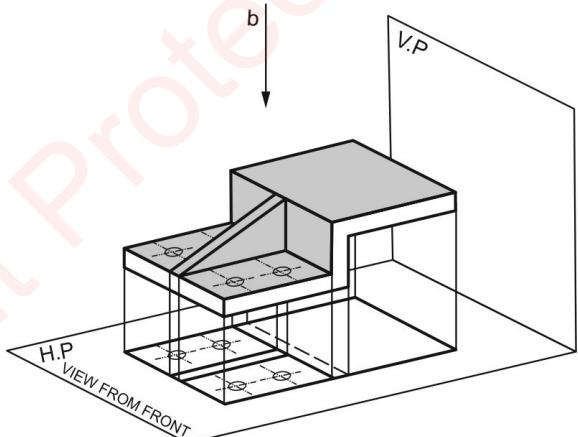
Pictorial drawing showing view from above of the clamping fixture
